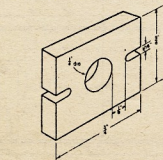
Dimensions of the insulating spacers used to hold bridge wires and outer conductor strips in place.
